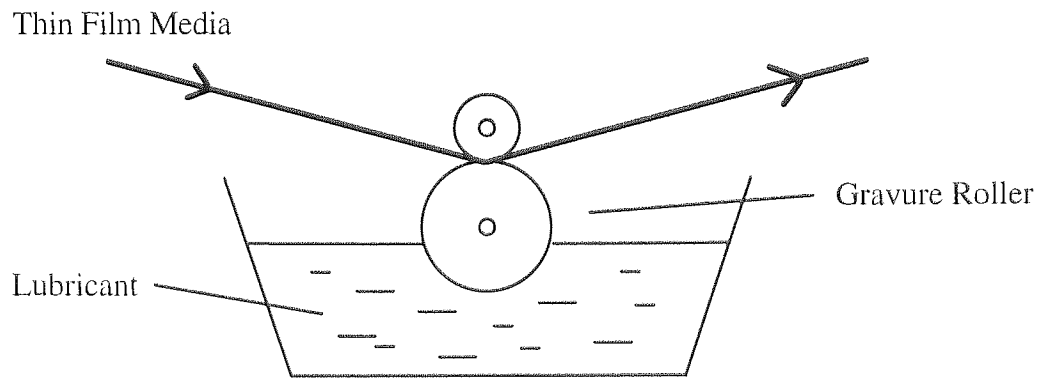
Deposition of the Lubricant Layer by Gravure Roller Techniques
